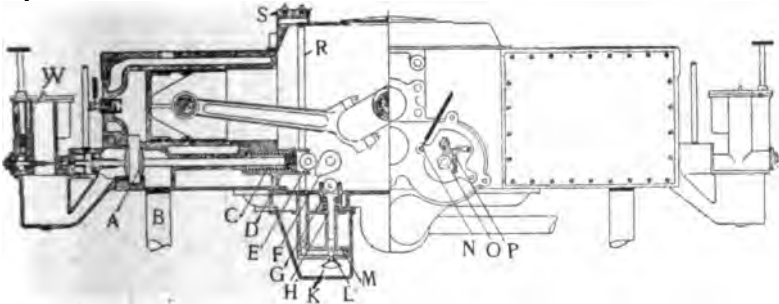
Sectional Diagram of the Winton Two-cylinder Motor and Parts. A, exhaust valve; B, pipe leading exhaust gases to muffler; C, exhaust valve spring; D, set screw; E, roller engaging cam, F, which also engages with roller, G, and operates oil pump piston; H; K, filter for oil forced from pump; L, ball valve on oil pump; M, by-pass for excess of oil from pump; N, primary wire from coil to breaker box; O, spark cam; P, contact adjusting screw; R, vertical pipe for oil forced from pump; S, oil conduit and adjusting screws to regulate flow of parts; W, pin projecting from float in carburettor. This cut also shows the shape and position of the carburettors, of the inlet valve air-line relief pipe, and the sparking plug. The hand wheels and spindles rising from the carburettors serve to regulate the maximum output of gasoline at each suction stroke.
